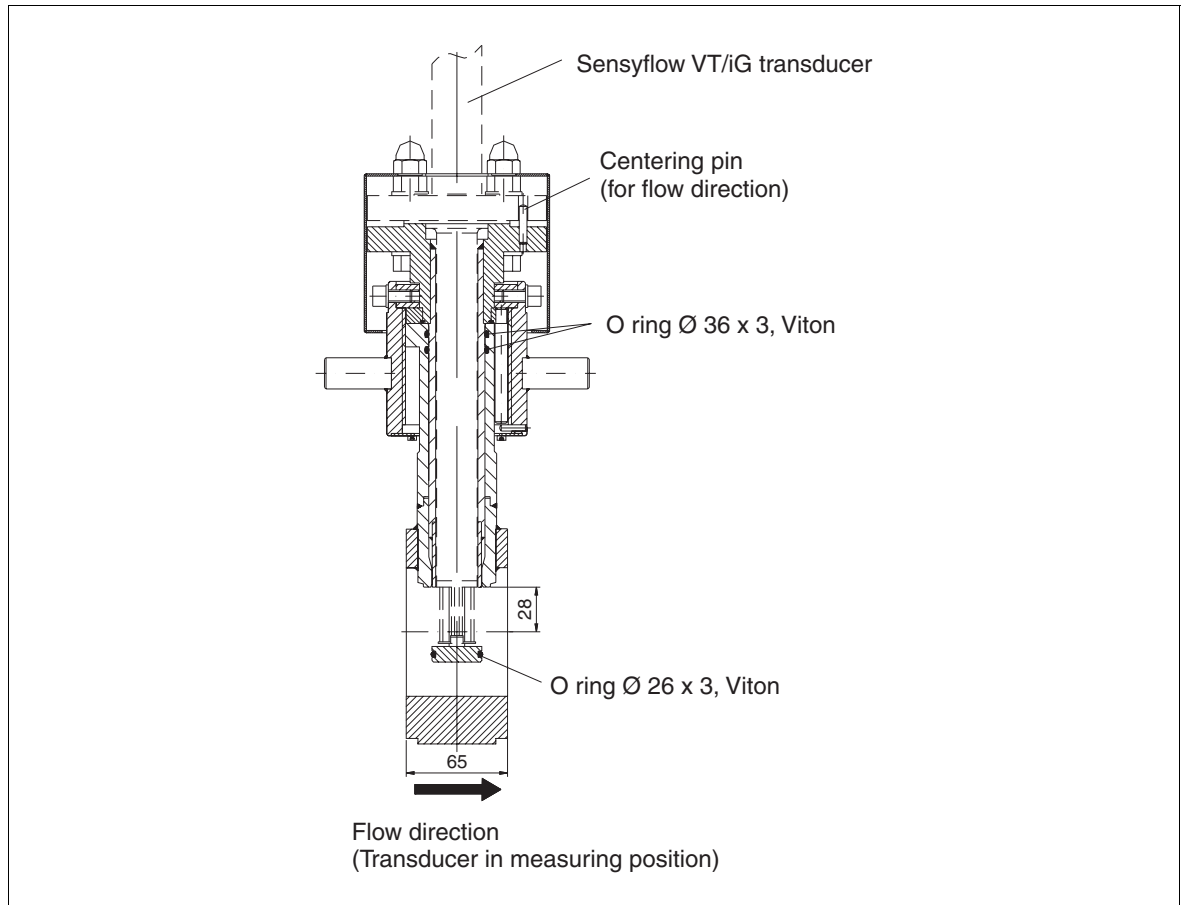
Hot tap fitting in wafer configuration for DIN flange PN 40
